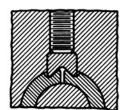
Here the shoe clamps the ring about the shaft. It is made in key form, i.e., a slot is cut in the external member to accommodate the shoe. The V in the shoc should be 90 deg.
